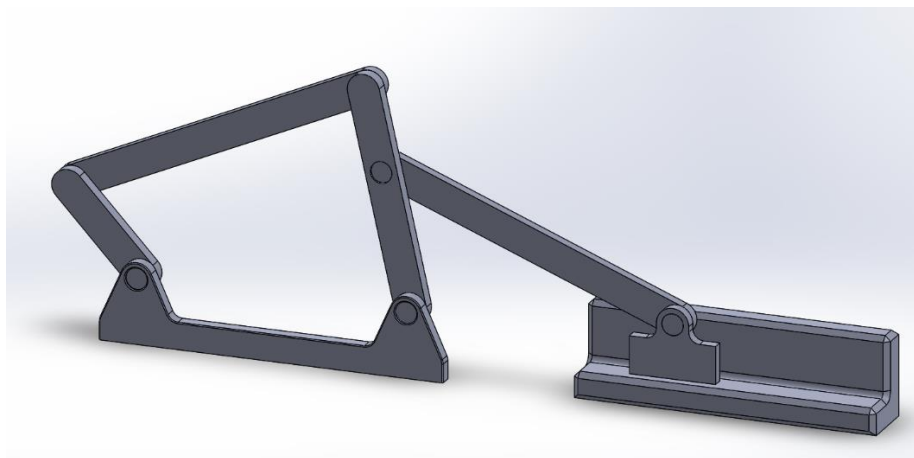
The final shape of the assembly geometrically modeled in SolidWorks
